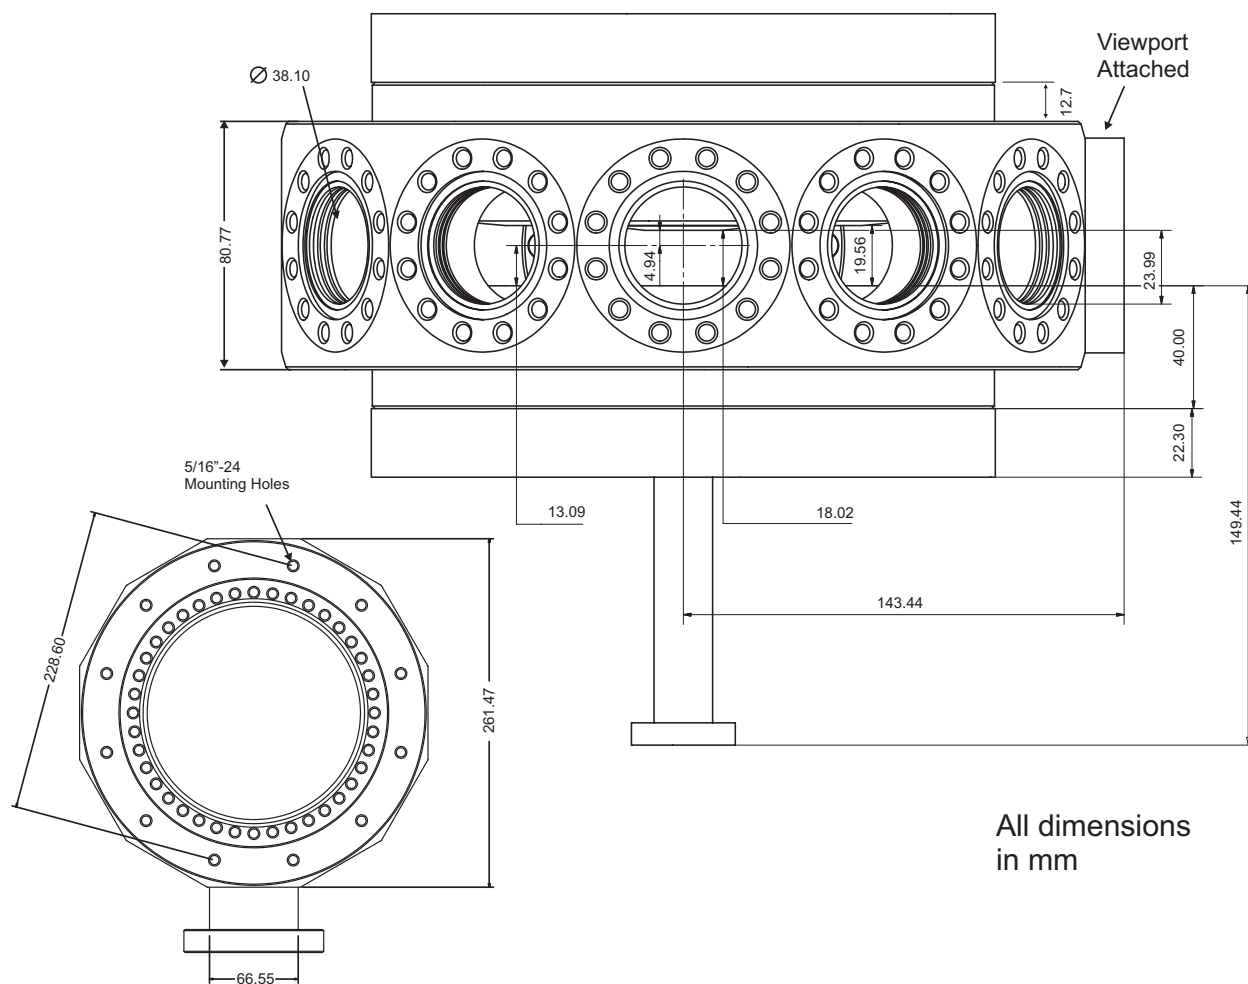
Technical drawing of the ^{40}K science chamber with the top and bottom flanges attached.
